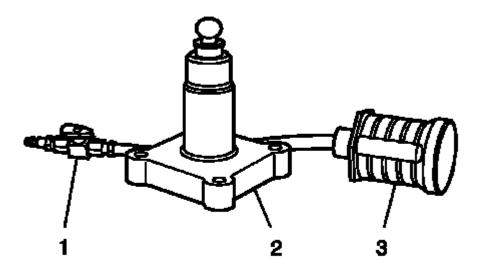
Identifying Cylinder Bore Sleeve Installer Assembly Courtesy of GENERAL MOTORS CORP.
